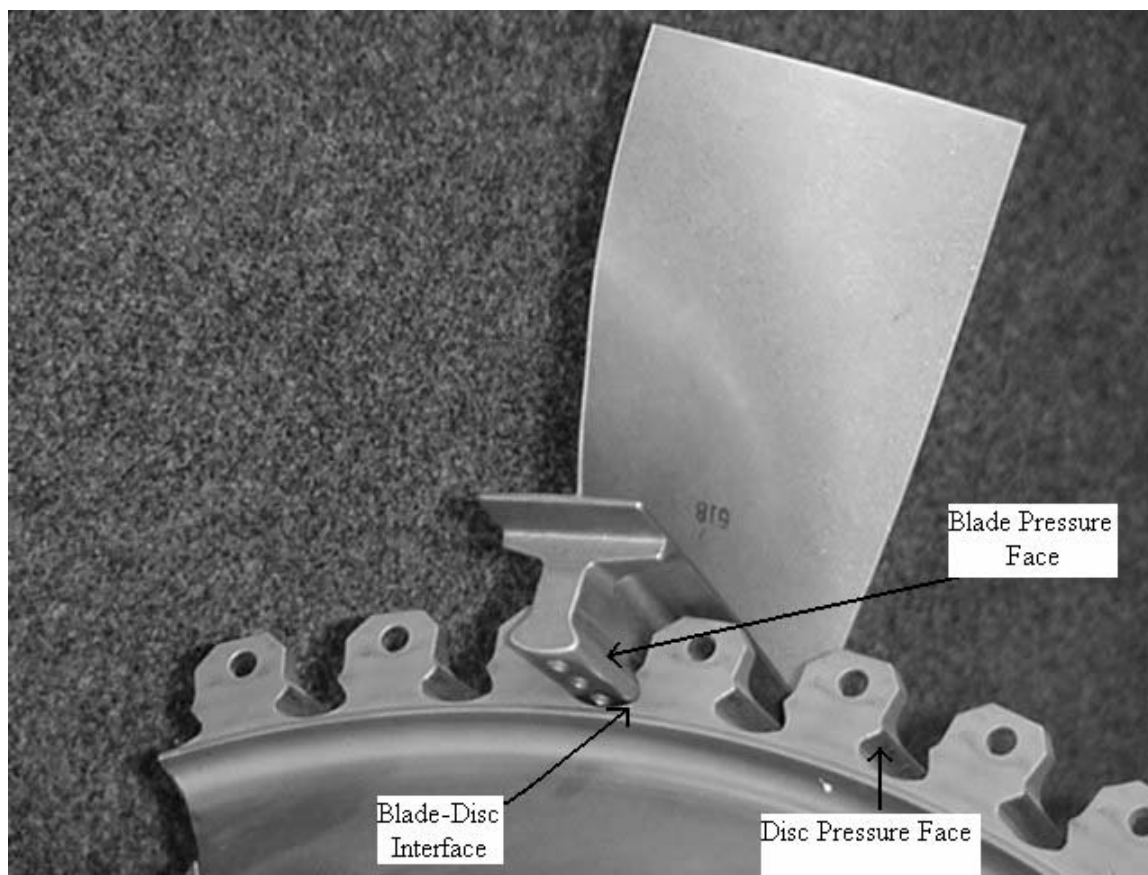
Blade/Disc Dovetail Joint in Turbine Engine.
